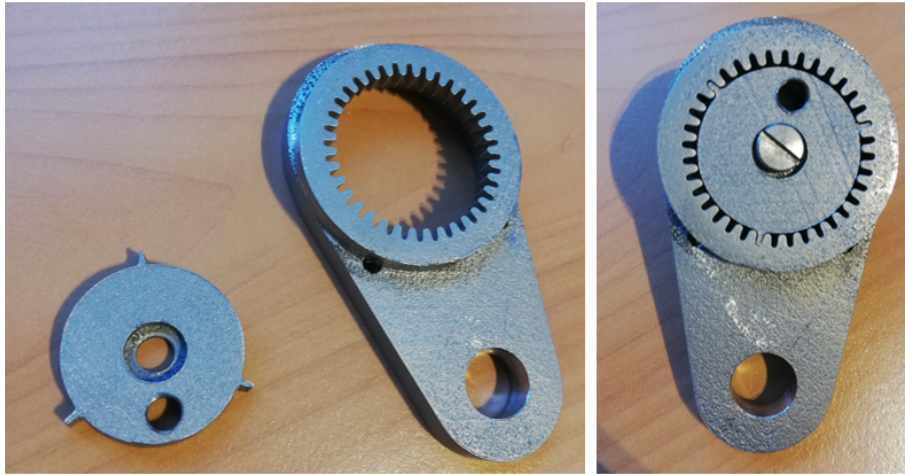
3D printed housing and gear made from 316 steel. As shown on the right, the parts fit together.
